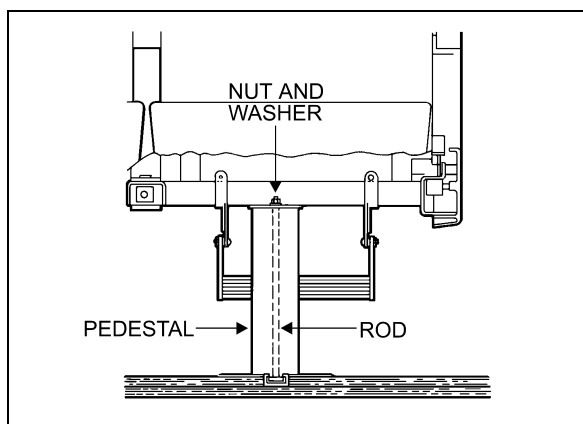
SEAT PEDESTAL ASSEMBLY
